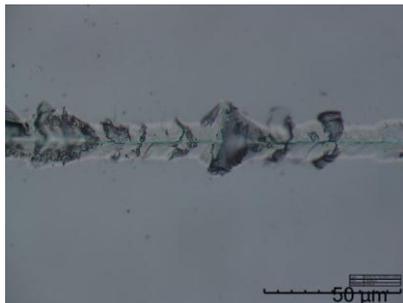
An example of a brittle fracture around a machined pattern on a Si wafer
